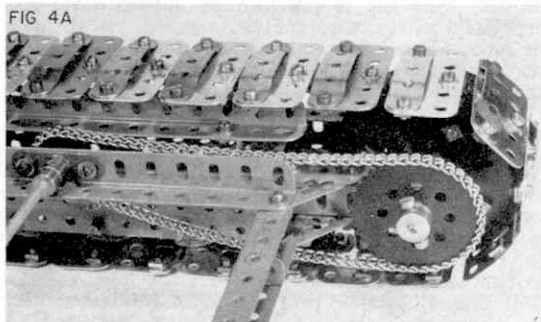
The sprocket chain drive and general track arrangement of the assembly shown in Fig. 4.
